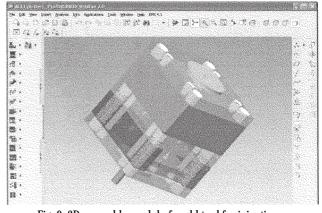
3D assembly model of mold tool for injection of distributor body
